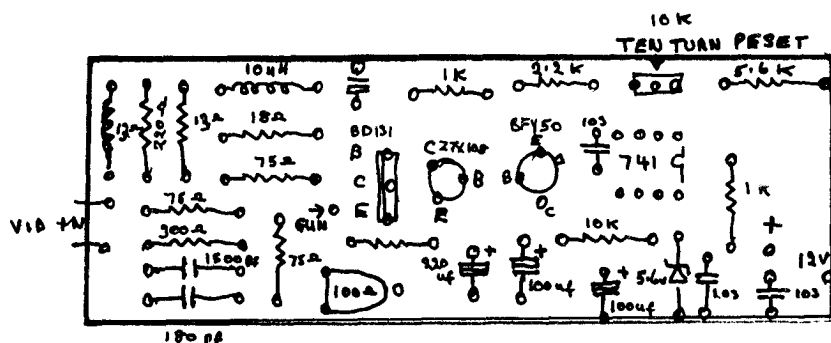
Transmitter Modulator and Gunn Diode supply PCB component overlay
